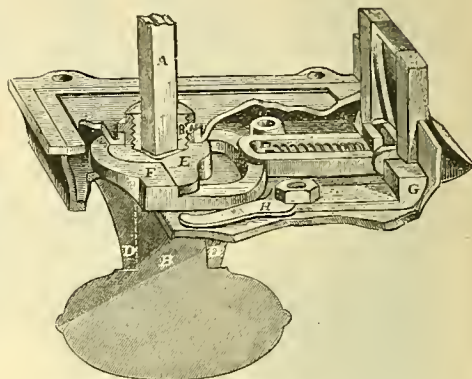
Screwless Knob and Spindle (o'd style). CAR-DOOR LOCK.
